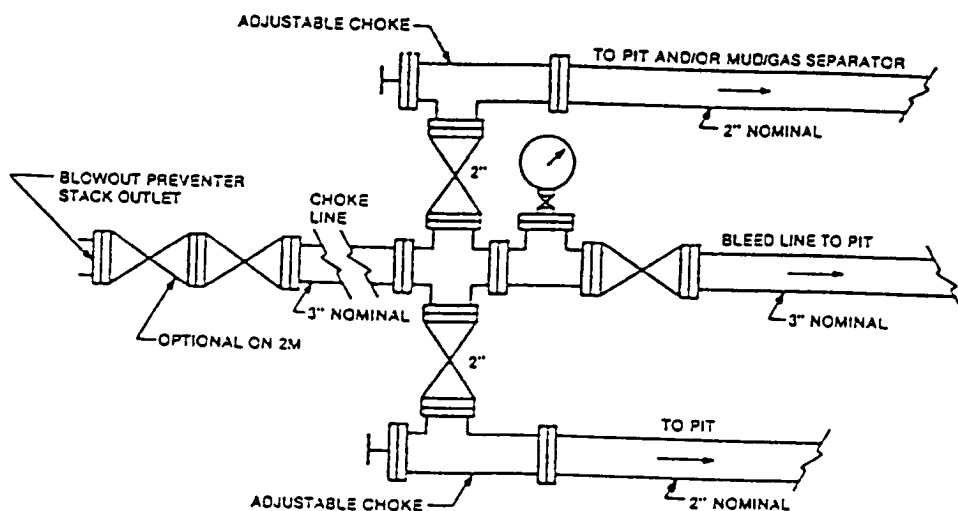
Typical choke manifold assembly for 2M and 3M rated working pressure service — surface installation.
